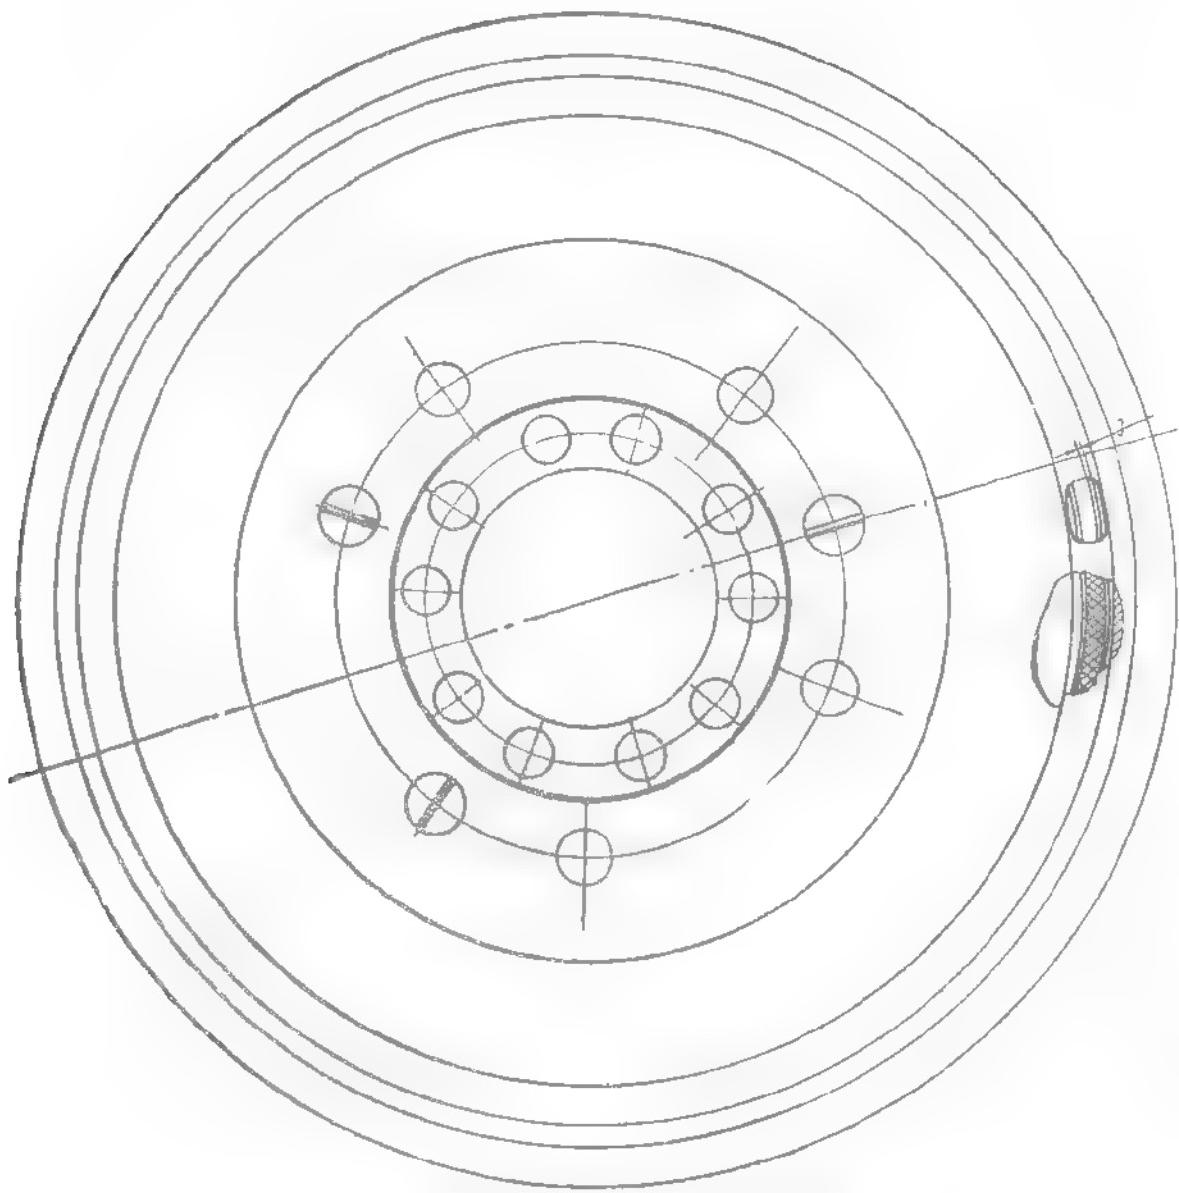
39. BRAKE DRUM OPENING FOR ADJUSTING THE BRAKE SHOES THE CLEARANCE.
